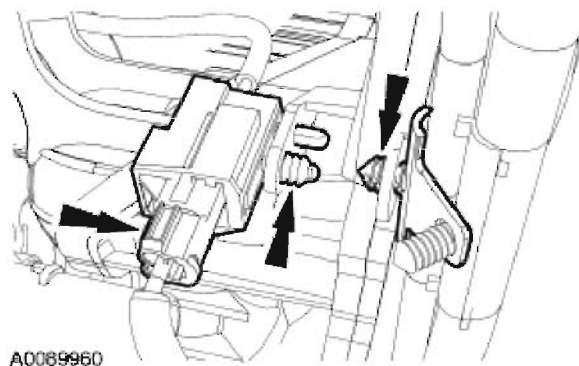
Locating Idle Air Control (IAC) Motor Electrical Connector
